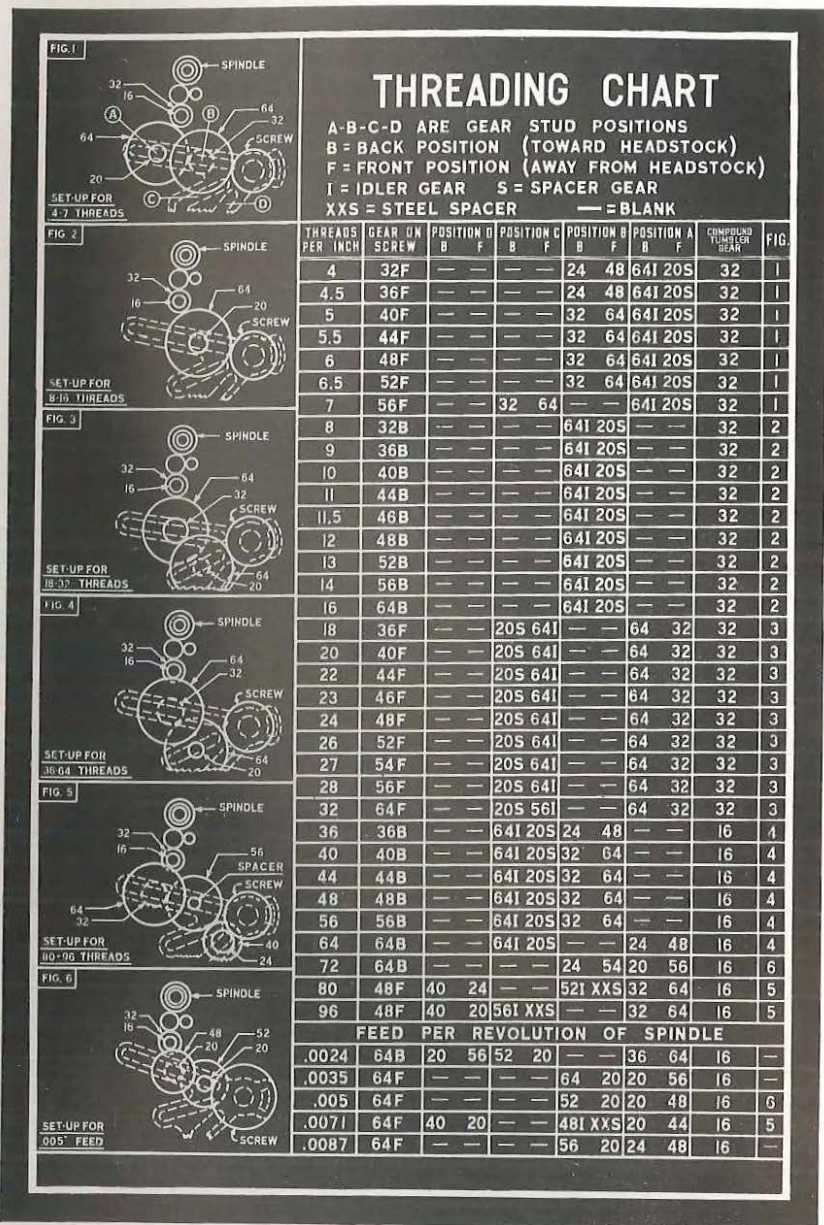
Threading chart for cutting standard threads between 4 and 96 per inch. For additional gear train data, refer to Table I, 150.
